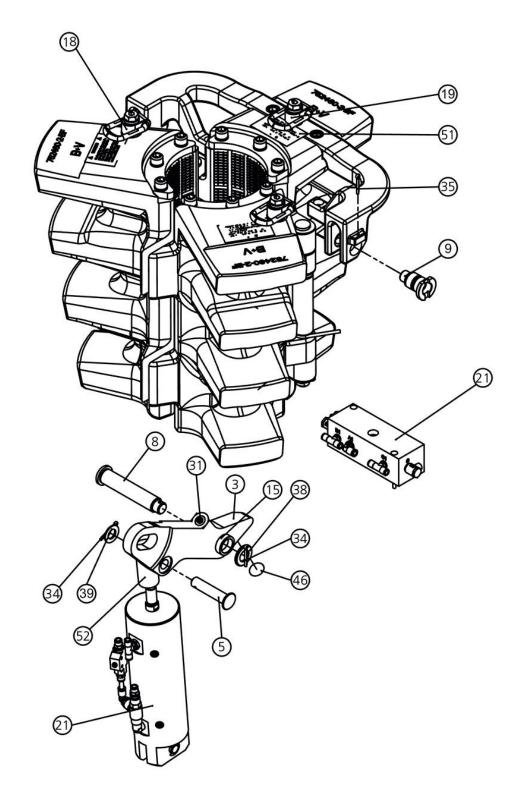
Principle drawing of a FMS-500-AIR part 5
